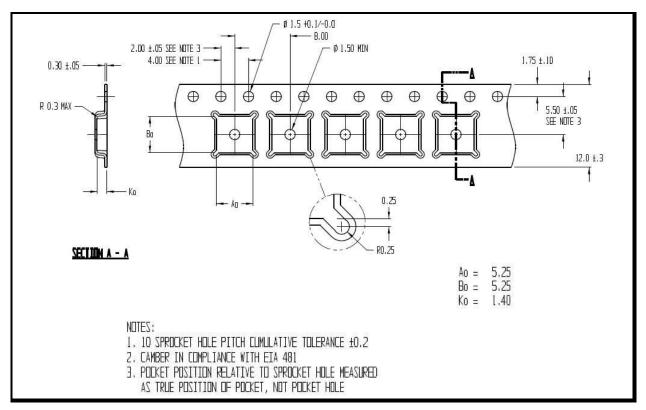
Detailed Tape and Reel Information (All diminensions in Millimeters)
